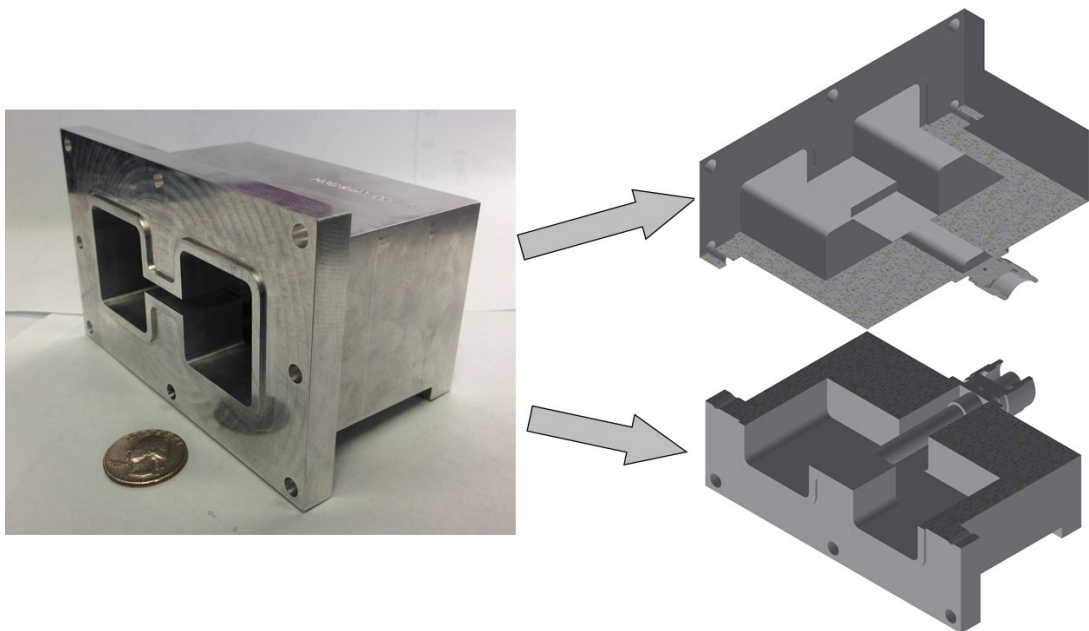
Photograph of the fabricated HOM coupler IC (left). A cross sectional view inside the mode transitional stage is also shown (right).
